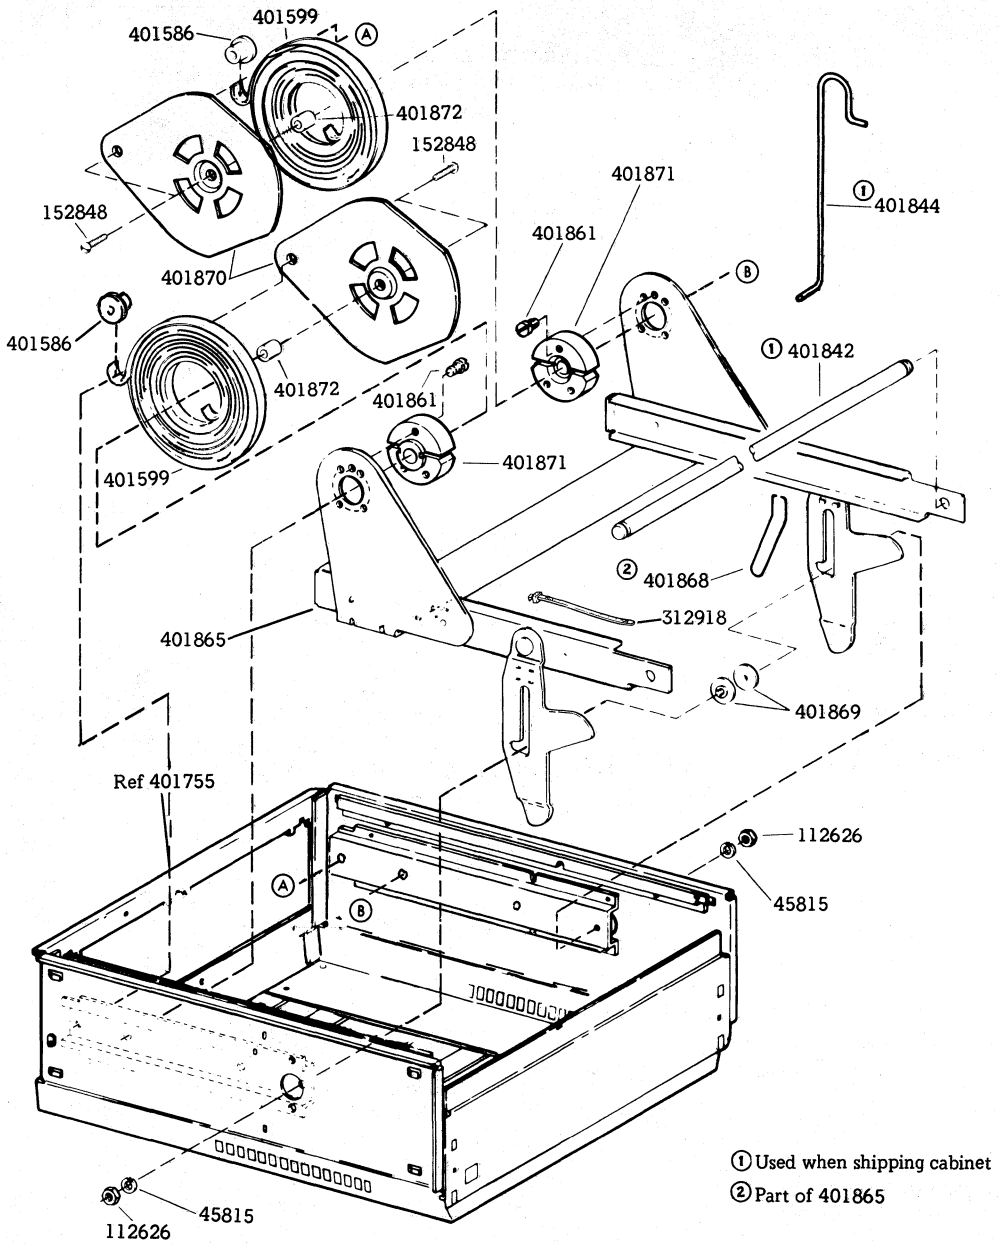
40CAB201/ZZ Printer Cabinet Core for Adjacent or RO Friction Feed Printer (Cont)
